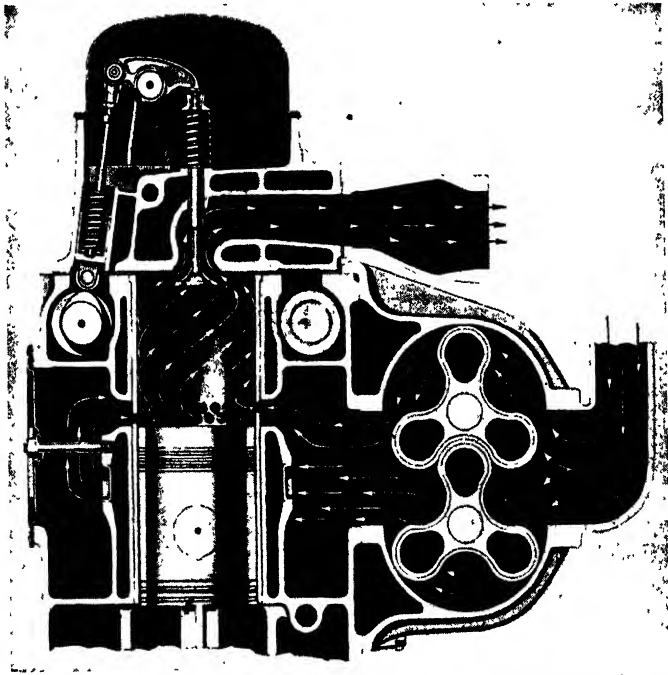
Section through cylinder of two-cycle single-acting engine, showing scavenging blower, scavenging air ports, and exhaust valve. (*General Motors Corporation.*)
